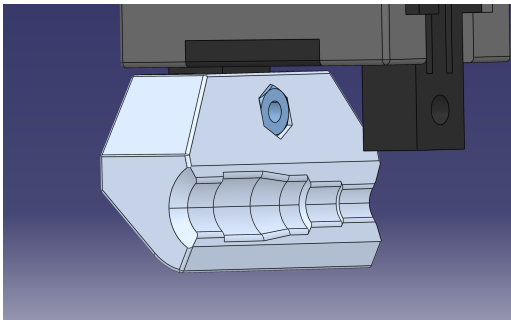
CAD model of gripper design used for Test 1 and Test 4 with traced profile of coaxial RF cable mounted on the Schunk P50 pneumatic gripper.
